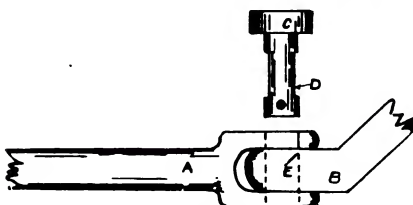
WHEN THE STEERING MECHANISM IS LOOSE
